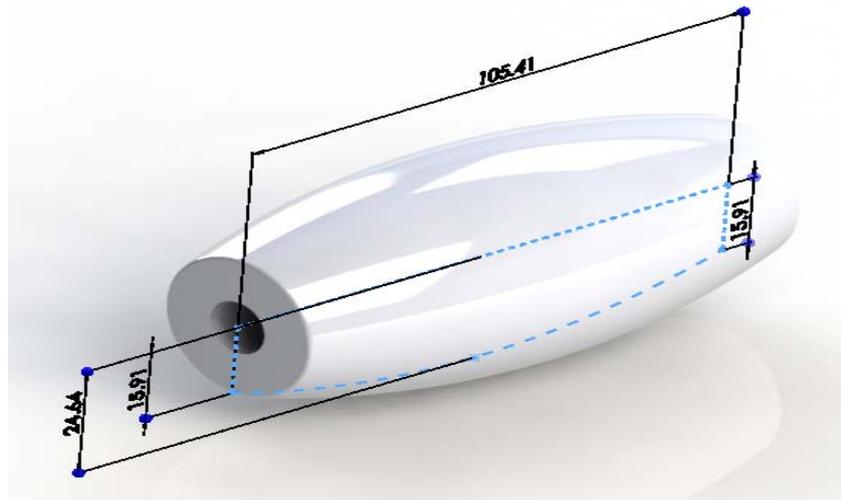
Roller's 3D model (Dimensions in millimeters)
